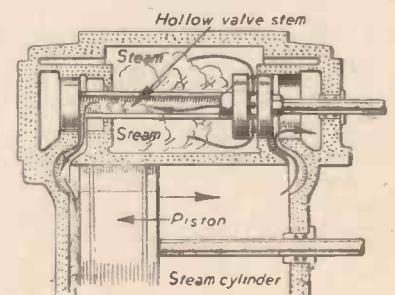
Sectional view of part of an engine cylinder showing a piston valve for controlling the distribution of steam.
